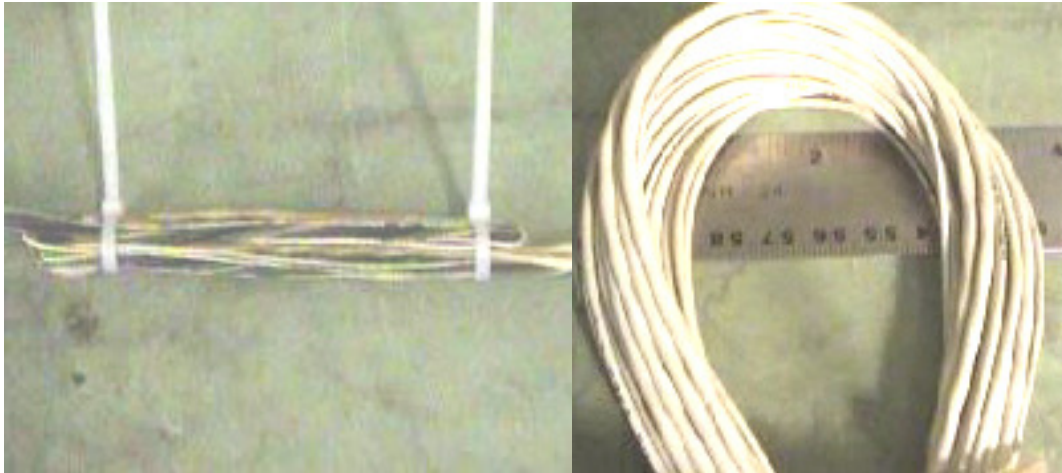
, Illustration of Harness Diameter Separation and Applied Tie-Band.
